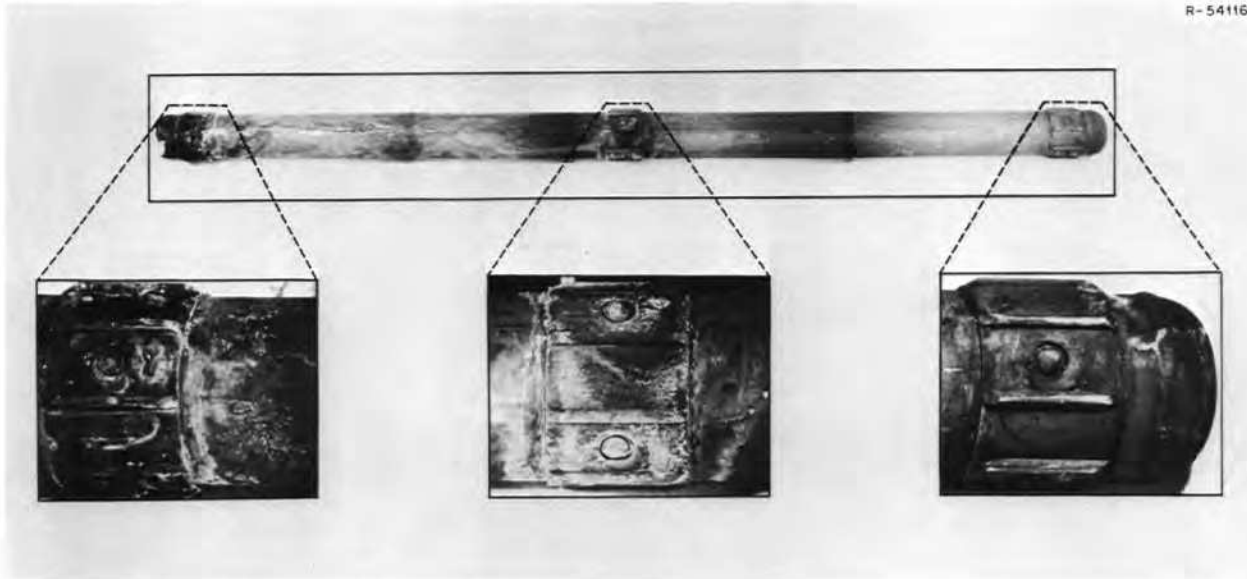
Portion of Hastelloy N control rod thimble removed from the MSRE. The cut end was near the axial center of the reactor. The bottom end was near the bottom of the core. The sleeves are Hastelloy N spacers and were held in place by a small weld bead.
